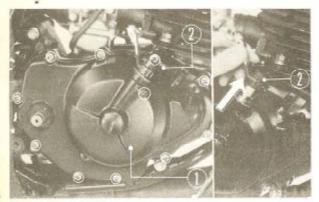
(f) Right crankcase cover 2 Clutch lever
